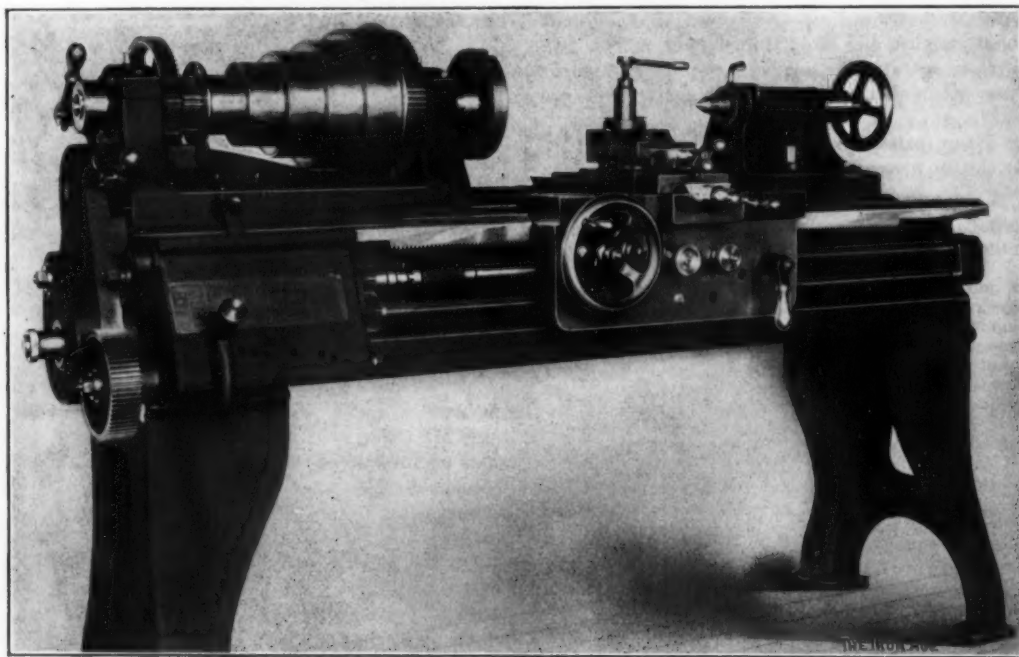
A New Quick Change Feed Lathe, Built by Flather & Co., Nashua, N. H.
